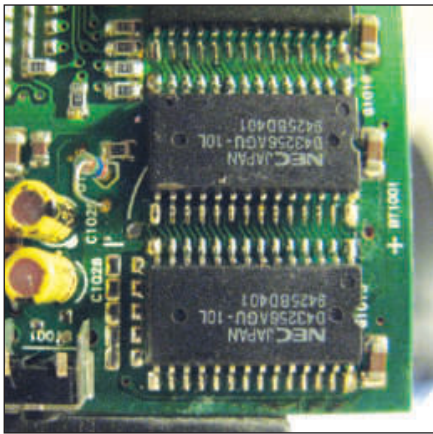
After the old cell is removed and the holes cleaned, the board should look like this. The battery + and – connections are marked on the board. [John Grout, KT4AD, photo]
